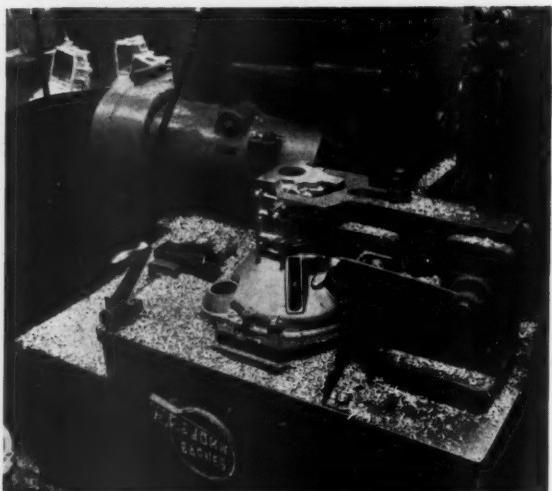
Special Barnes two-spindle miller for milling the rear end and the top cover face of gearbox casings at one pass
